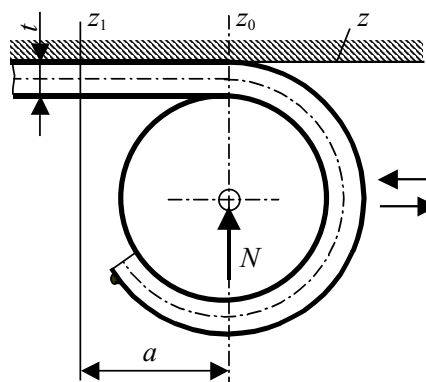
Schematic diagram of a roller-band mechanism used to examine geometrical slipping
